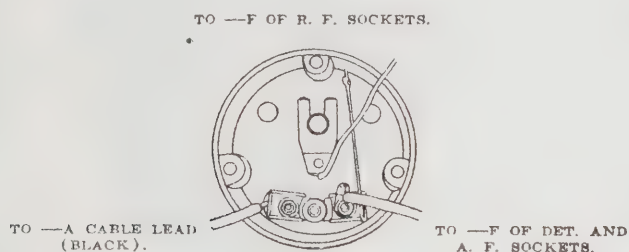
REAR VIEW OF RHEOSTAT AND FILAMENT SWITCH ASSEMBLY USED IN MODEL 35.
